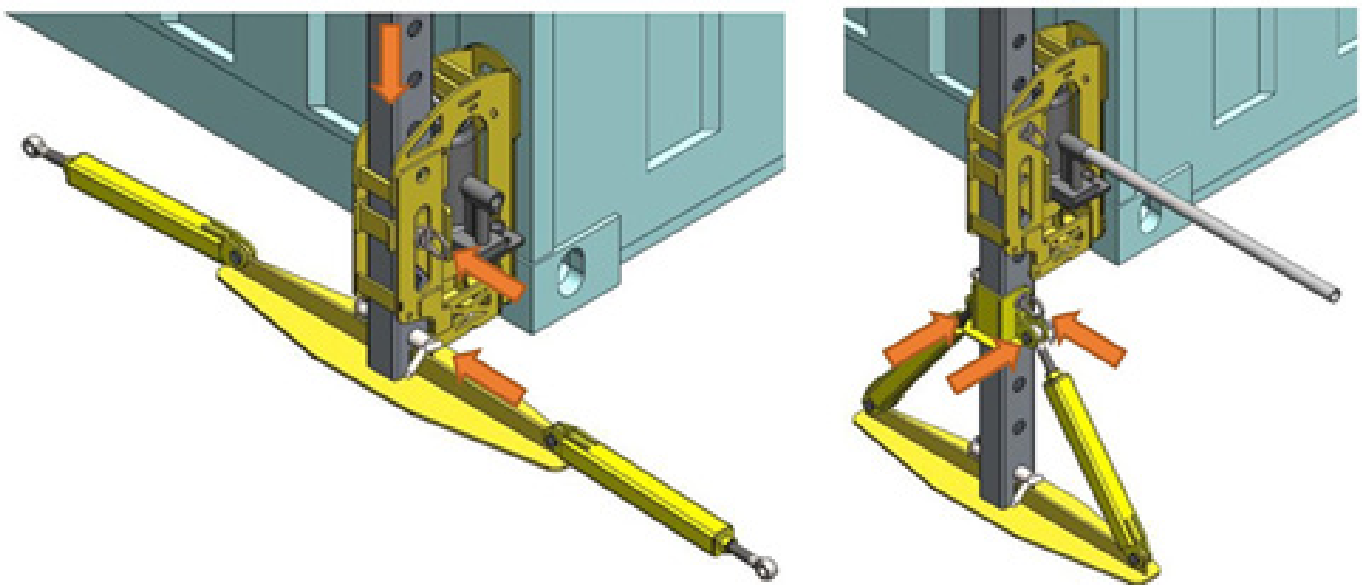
Mounting of climber unit, support leg assembly, lower main tube, support leg bracket and side supports.
